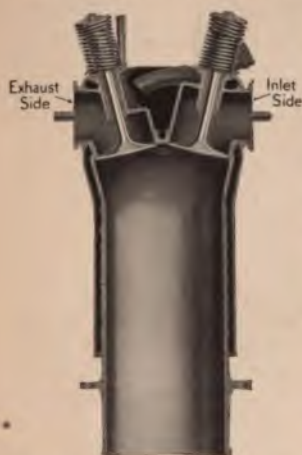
Cylinder for Liberty engine, half in section, showing jacket, valves, and holding-down flange
